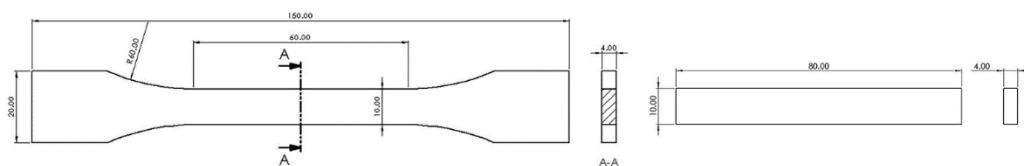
Tensile specimen (left) and flexural specimens (right) (all dimension in mm).
